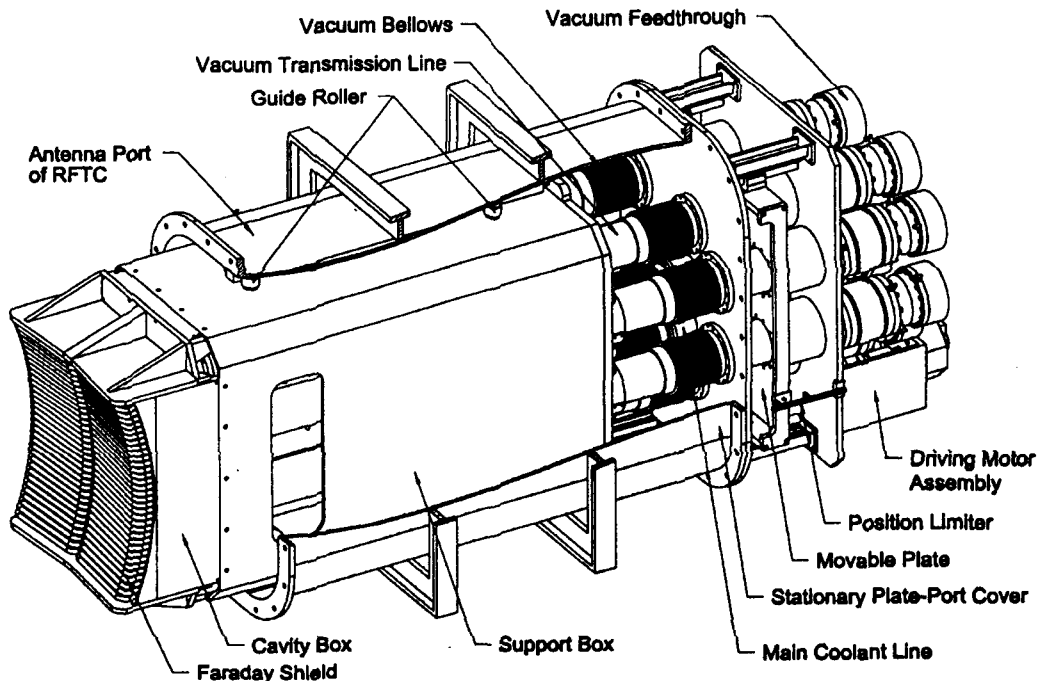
3-D Drawing of KSTAR ICRF Antenna
